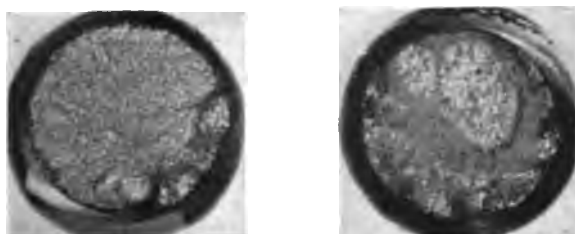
TEST-BAR FRACTURES FROM TREATED FORGING 948C. $\times 2$.
